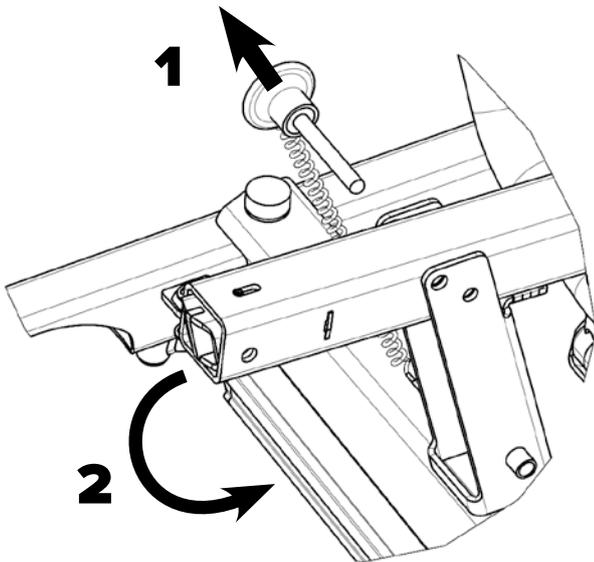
1) remove the magnetic locking shaft, 2) straighten the mast until the safety latch engages.
